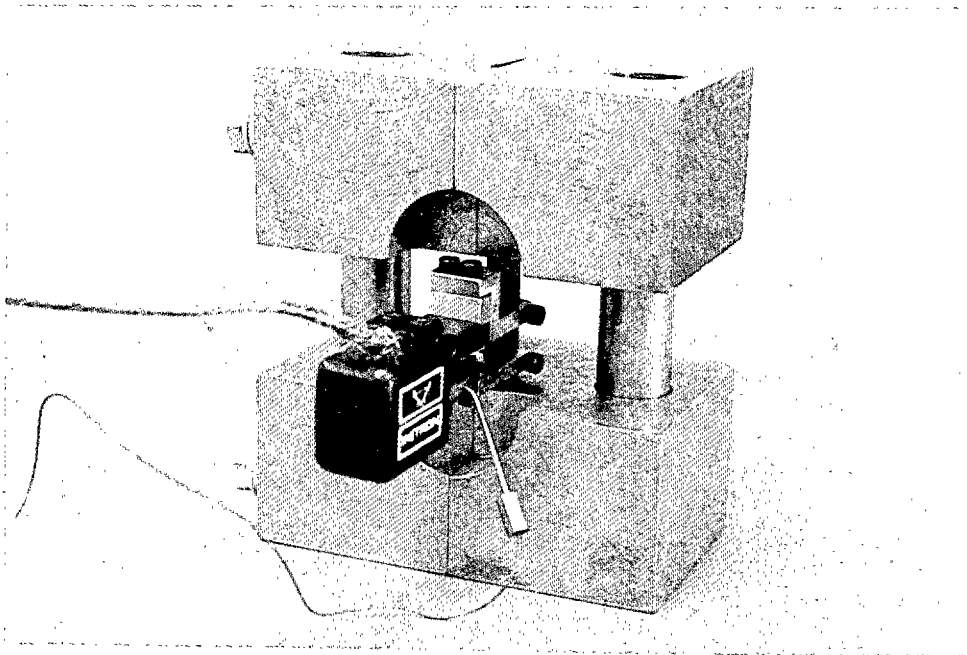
End Loaded, Side Supported Compression Test Fixture.
